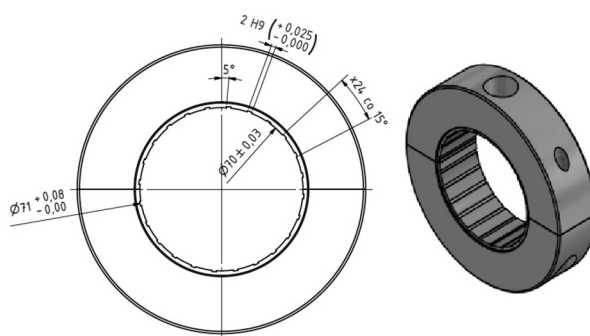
Tested bearing modification allowing for torque transfer from the shaft onto the shell (front and axonometric views)
